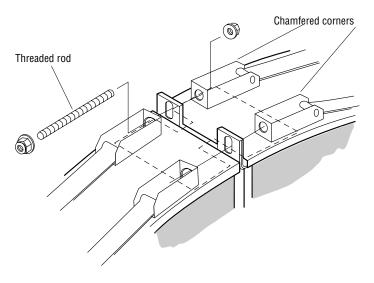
2. If the distance between the strap ends for the last two bolts is too large, use the threaded rod. First tighten one of the clamping straps until the M10 x 80 mm long bolt can be fitted into the other clamping strap.
